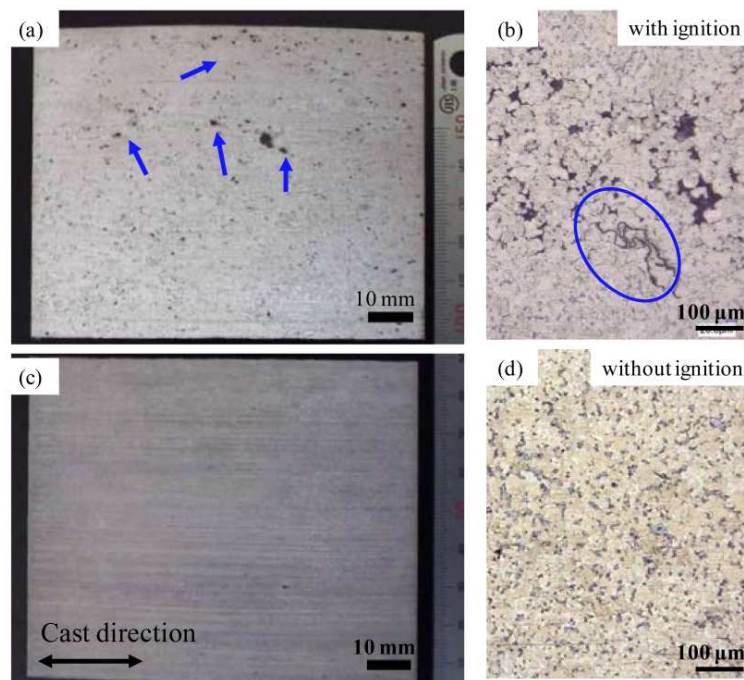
Surface of cast material plate with ignition (a) and without ignition (c), and optical micrographs of twin-roll cast material with ignition (b) and without ignition (d).
